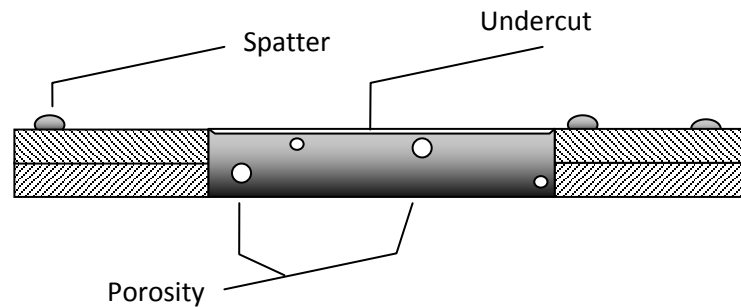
Schematic: Longitudinal weld section showing porosity, undercut and spatter
